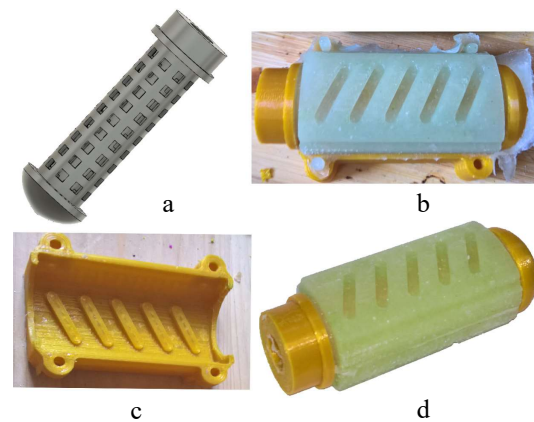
Screwdriver handle prototype *a* – handle geometry; *b* – 3D-printed mold; *c* – part after curing; *d* – handle prototype.
